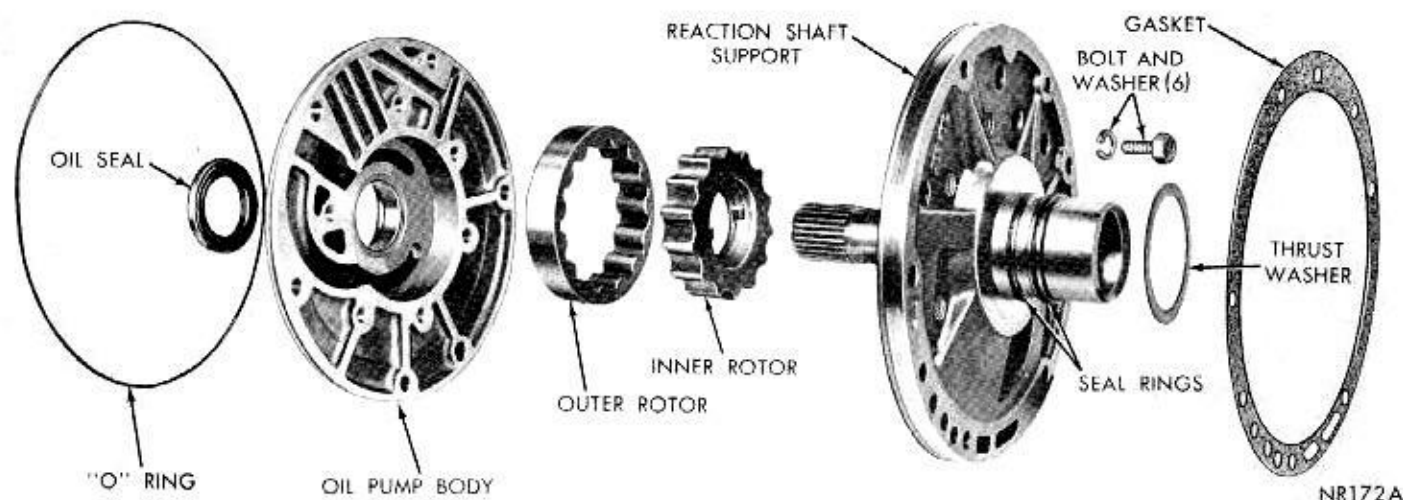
Oil Pump and Reaction Shaft Support Disassembled (A-904)
